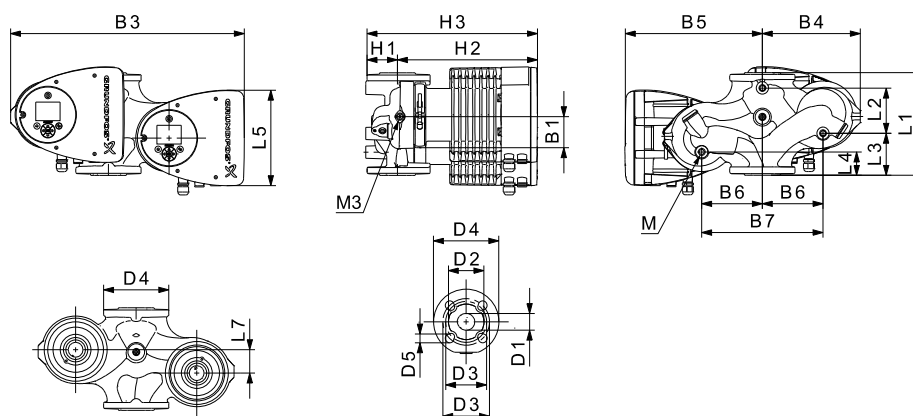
Dimensions, twin-head pumps, threaded versions
